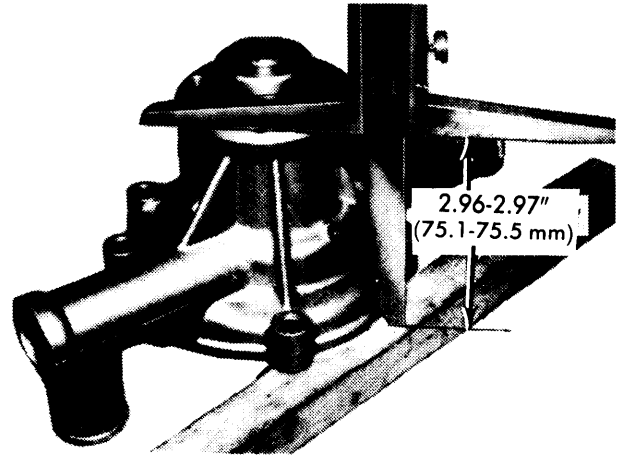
Measuring Clearance Between Hub Flange and Pump Face
